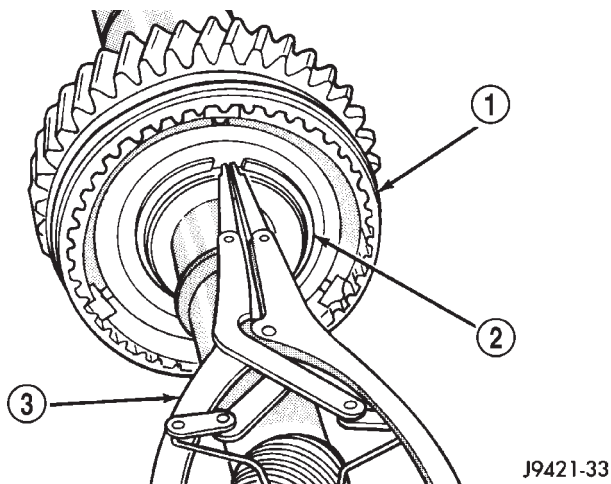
Fifth-Reverse Synchro Hub Snap Ring Removal
